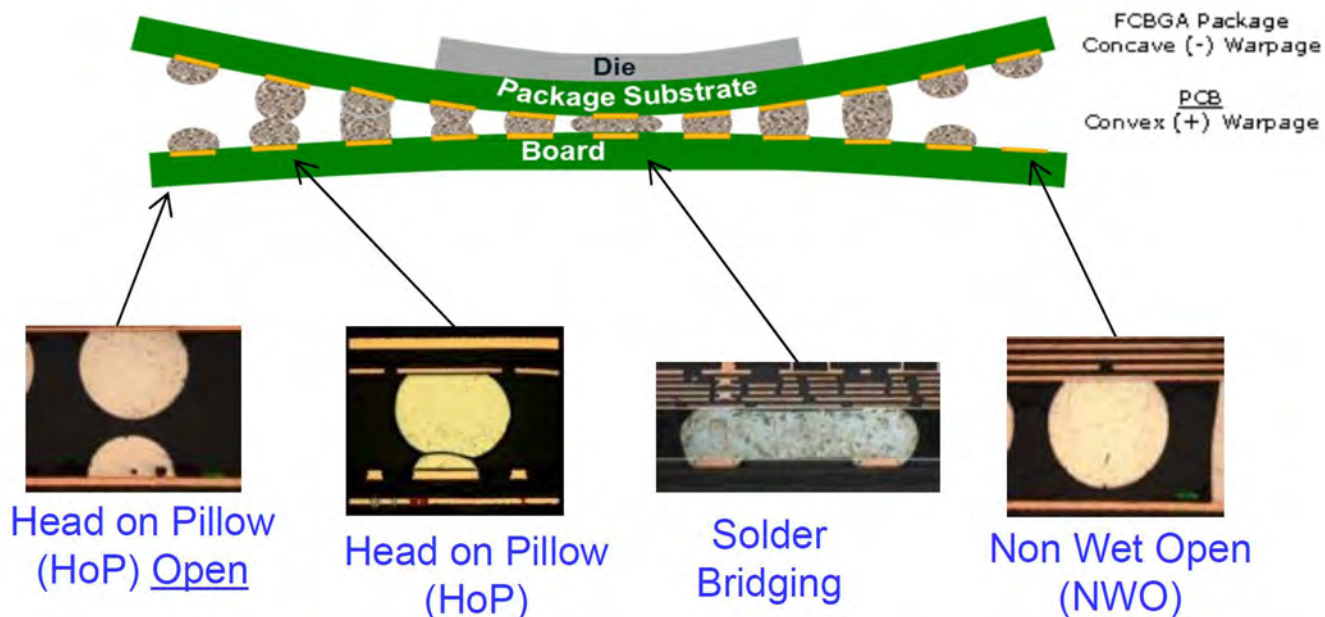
Defects caused by dynamic warpage of FCBGA components during reflow soldering ^[1].
